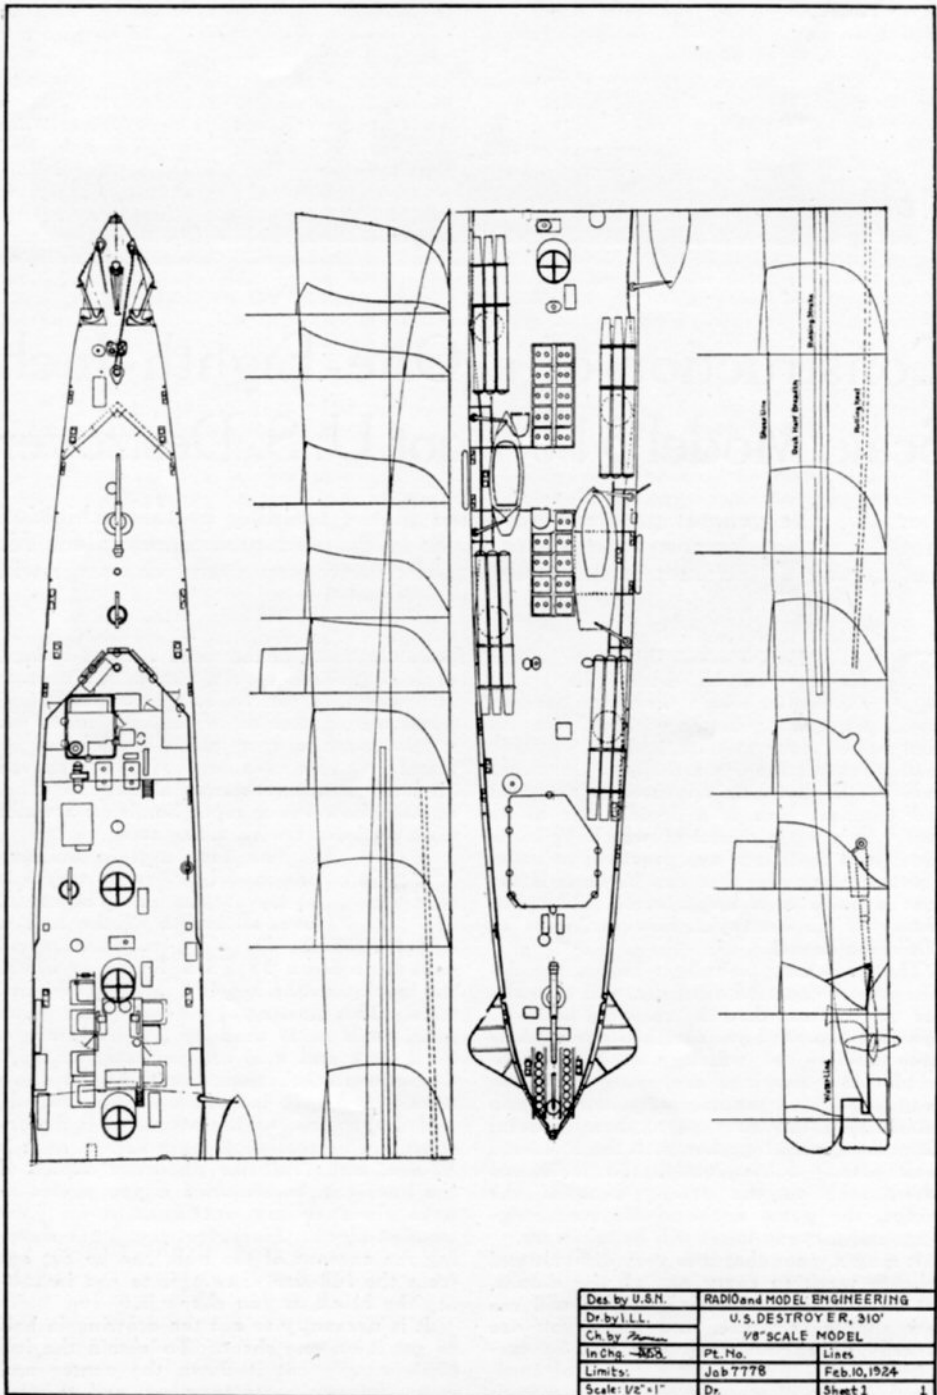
One-fourth scale drawing of the destroyer hull. Dimensions on this drawing must be multiplied by 4 to give the correct sizes for a 1/8-in. scale model
